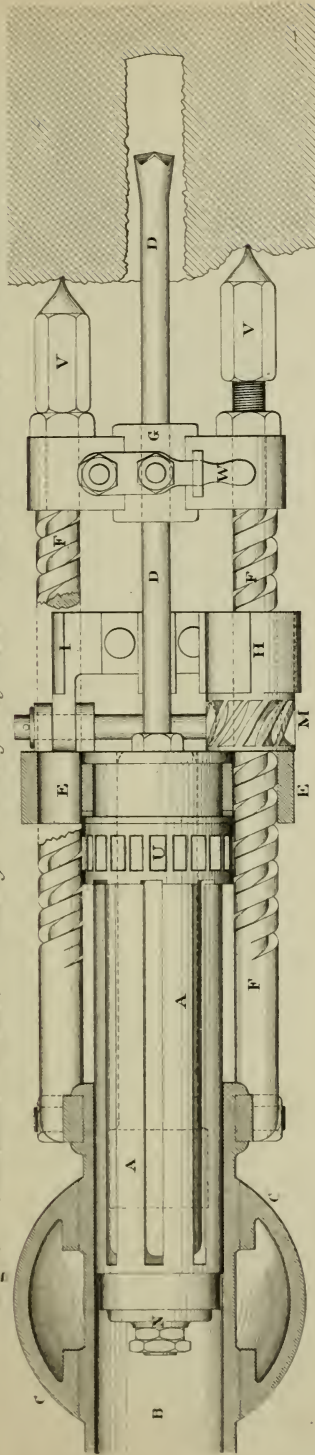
Longitudinal Section, showing Piston Rod striking Tappet for advance of Working Cylinder.
